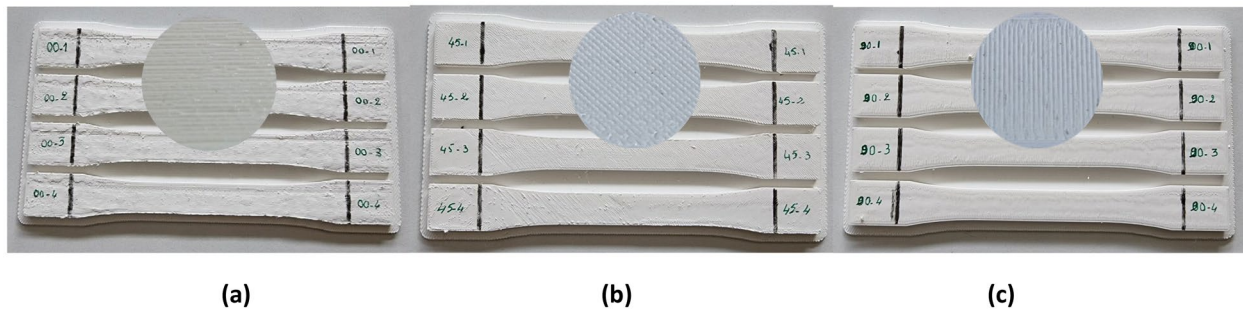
3D printed tensile test specimens for each printing orientation. The circular images show a zoomed-in view of the printing orientation. (a 00°, b 45°/-45°, and c 90°)
